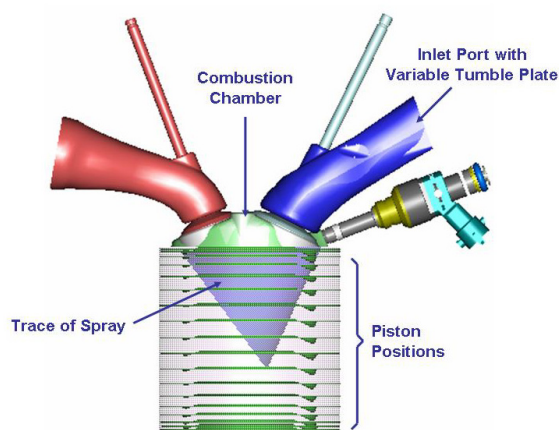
Combustion Chamber for Gasoline Direct Injection
